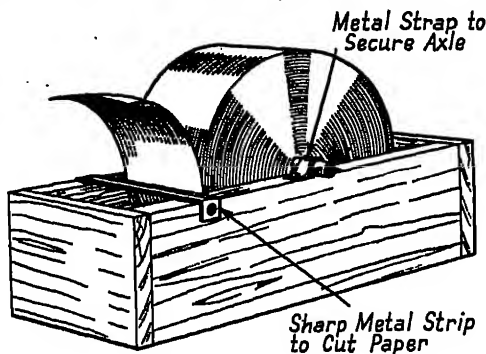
A HOLDER FOR GUMSTRIP ROLL
